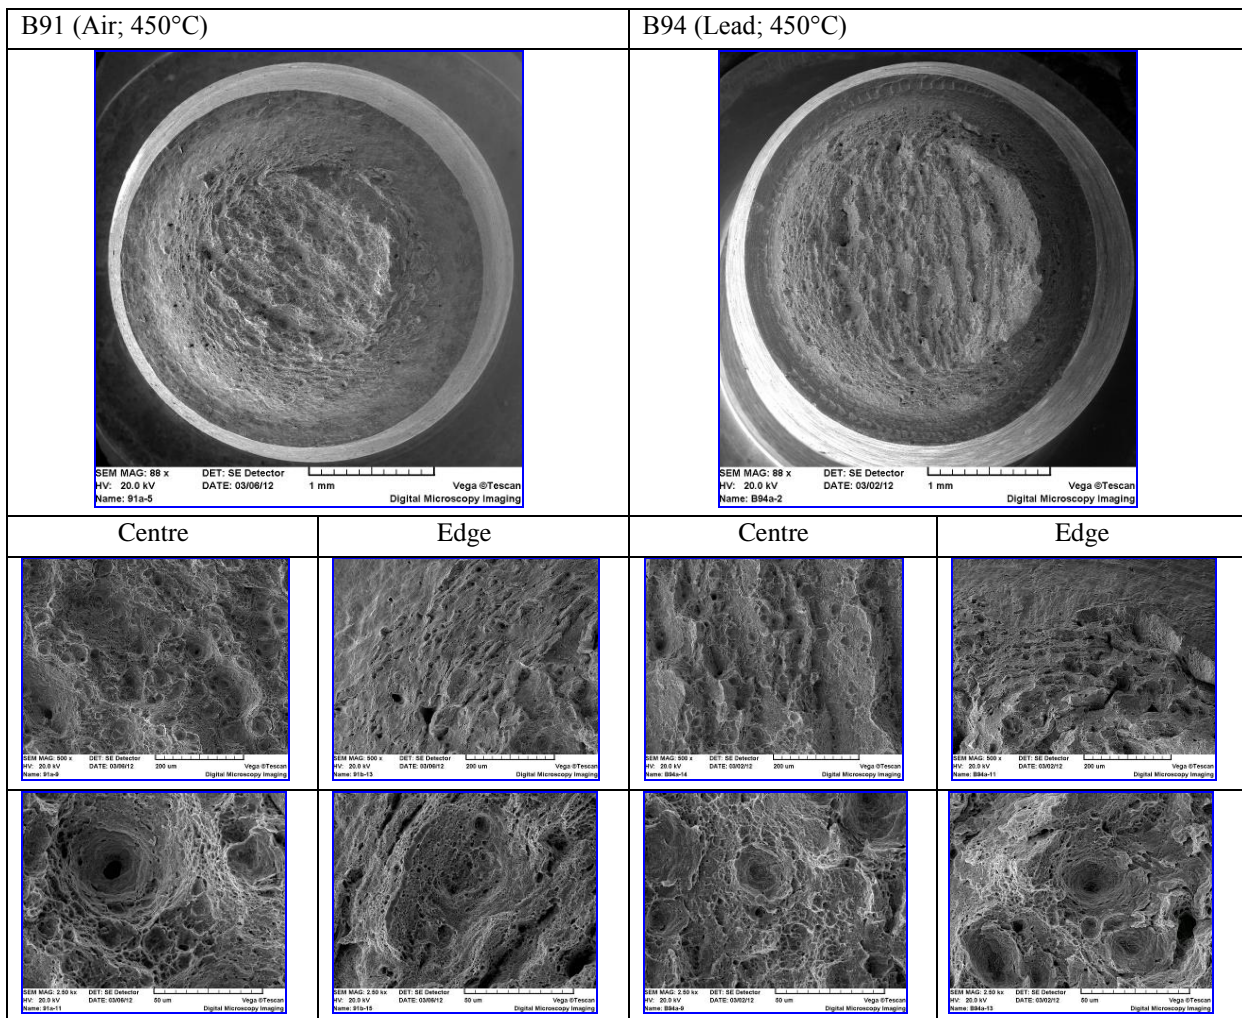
Fracture surfaces of specimen tested at 450°C
